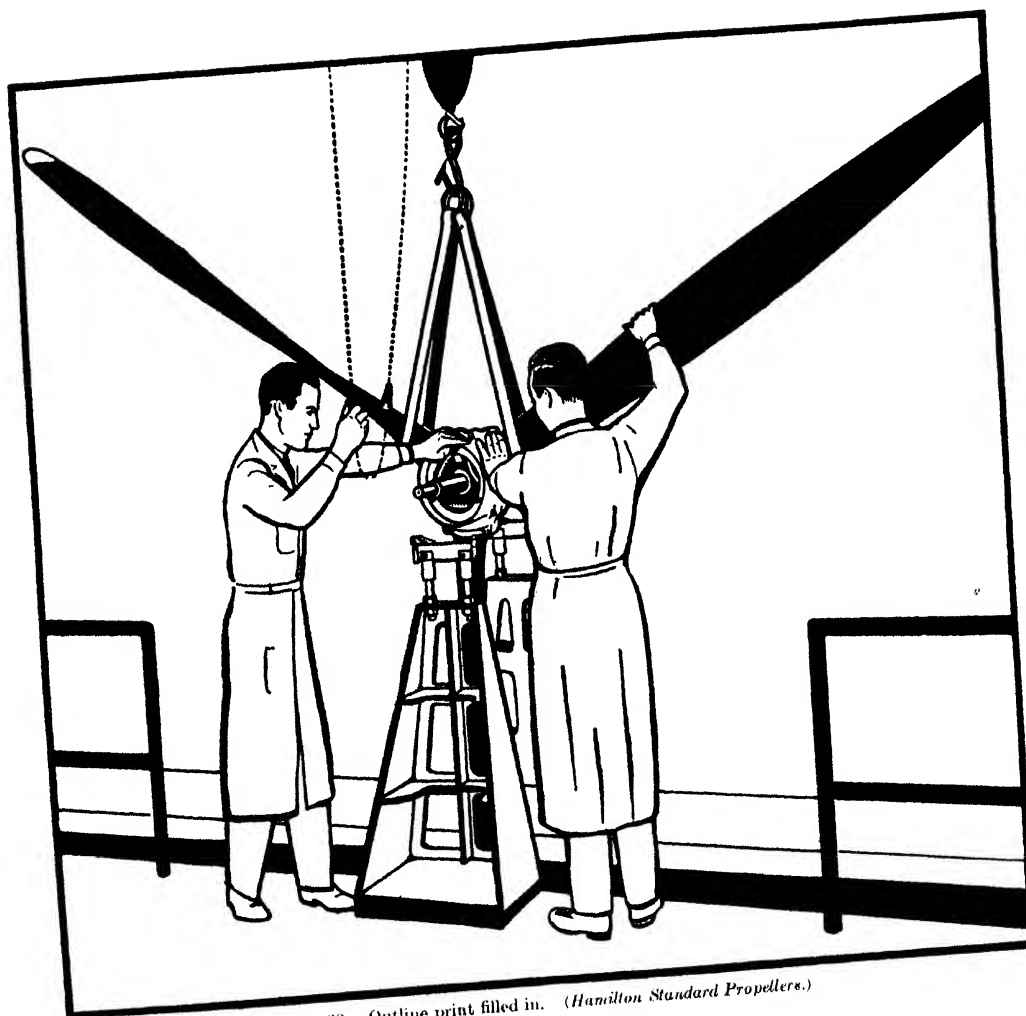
Outline print filled in. (Hamilton Standard Propellers.)
